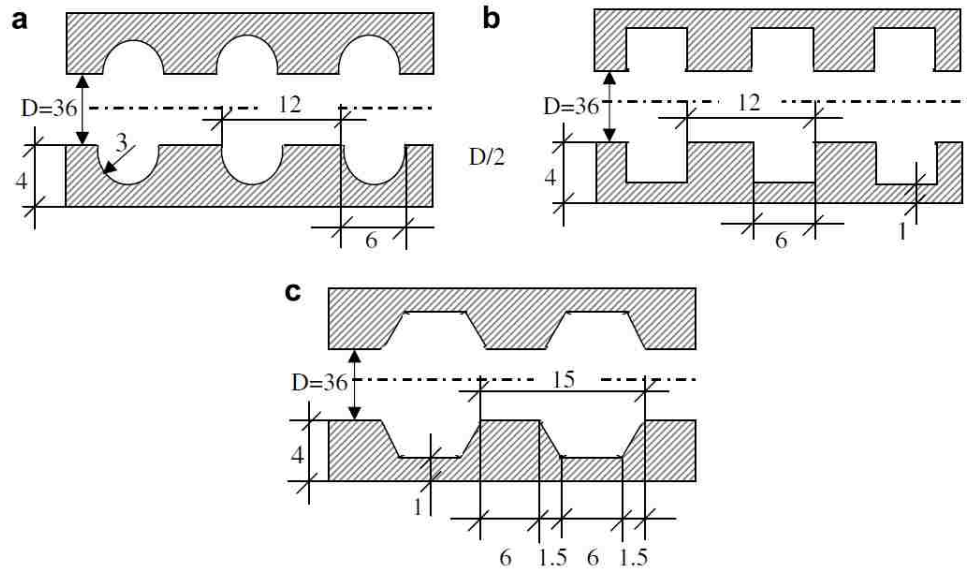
Geometric Shapes of the Grooved Tube, Dimension in mm (a) Circular, (b) Rectangular and (c) Trapezoidal Grooves [6]
